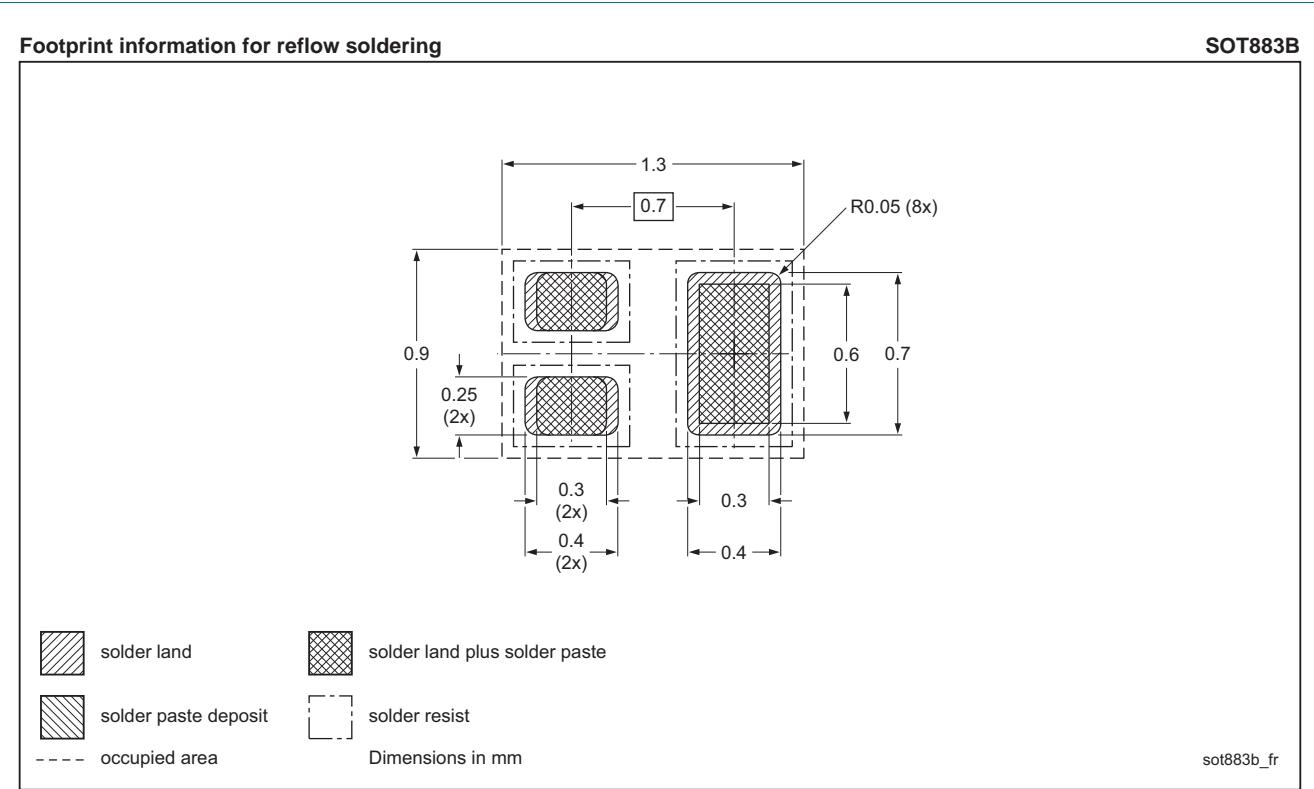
Reflow soldering footprint for SOT883B (DFN1006B-3)
